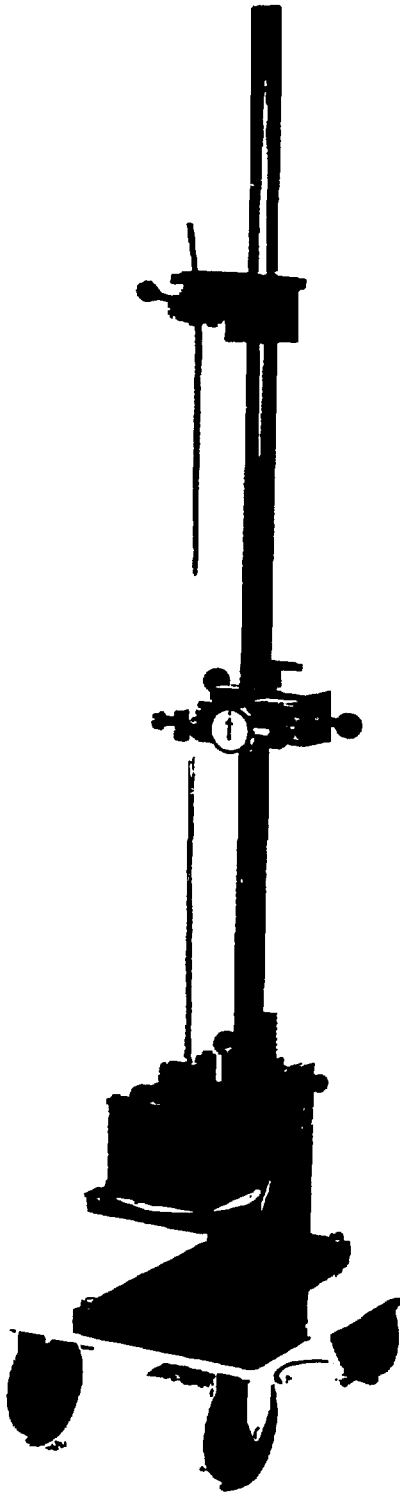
Fixture for incoming inspection of SSC cable width and residual twist.
